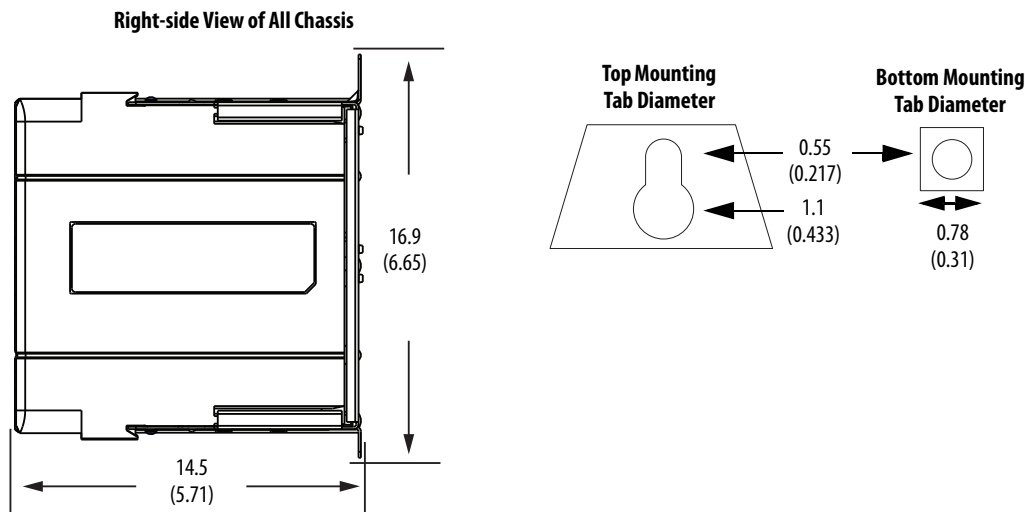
1756-A4/B Chassis and Chassis Adapter Module
